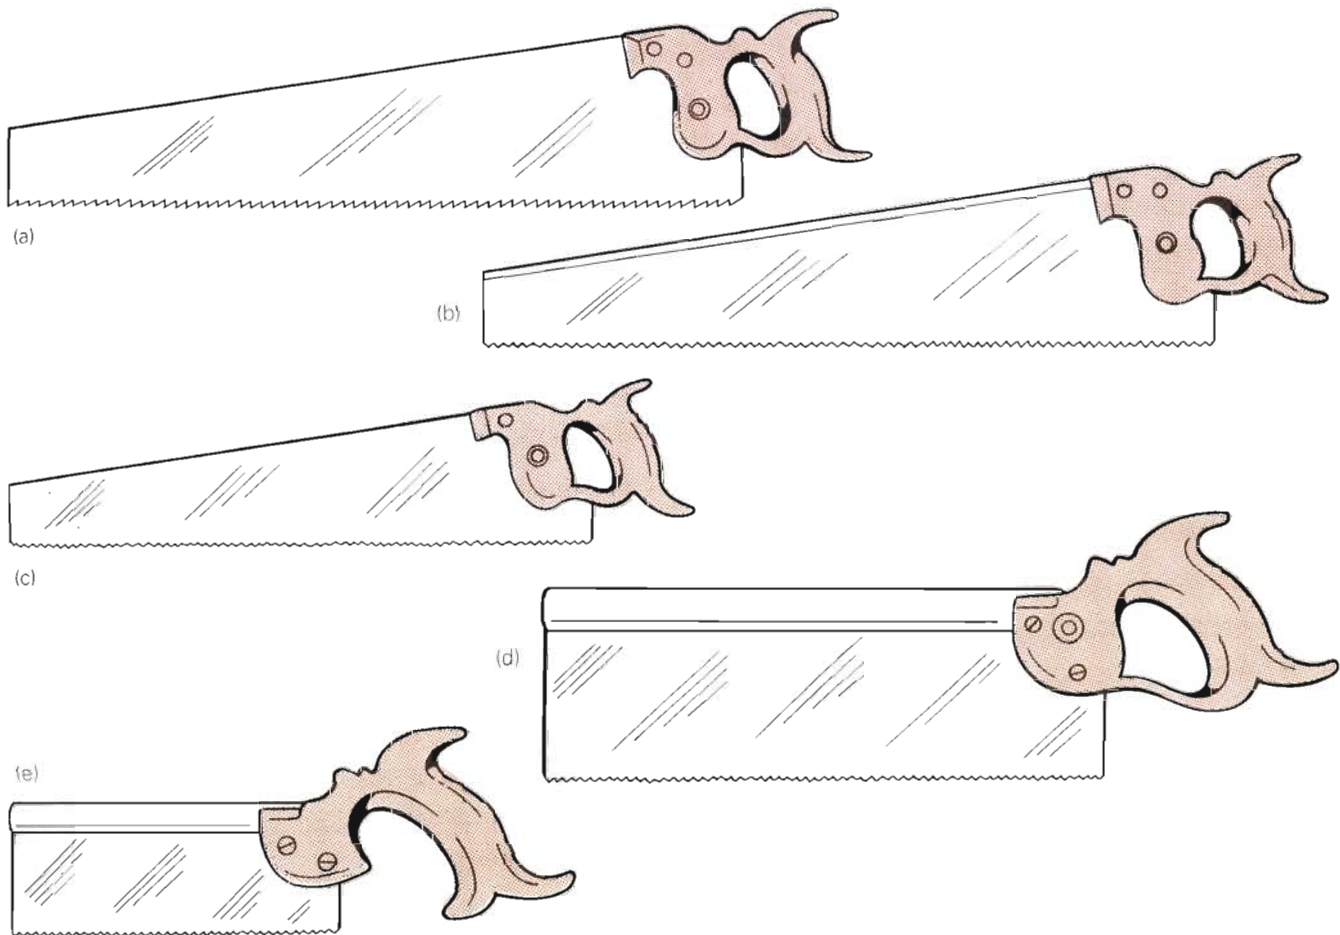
Hand and backed saws: (a) cross-cut, (b) rip, (c) panel, (d) tenon, (e) dovetail.
